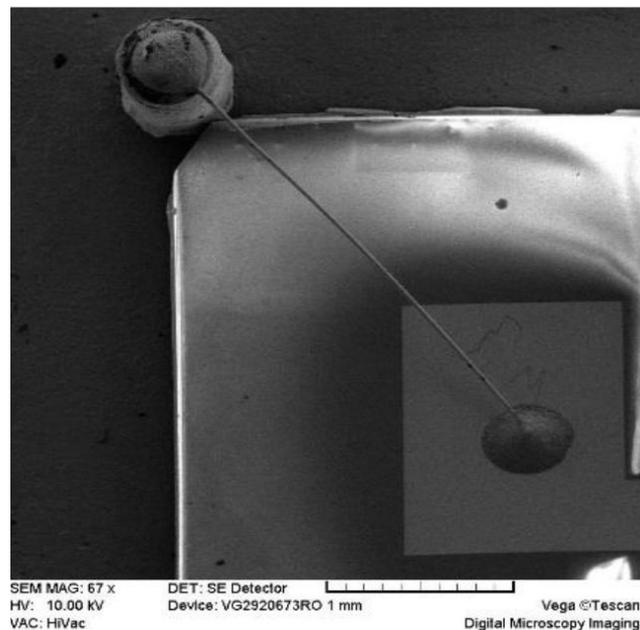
a. SAW chemical SH-SAW sensor packaging:
